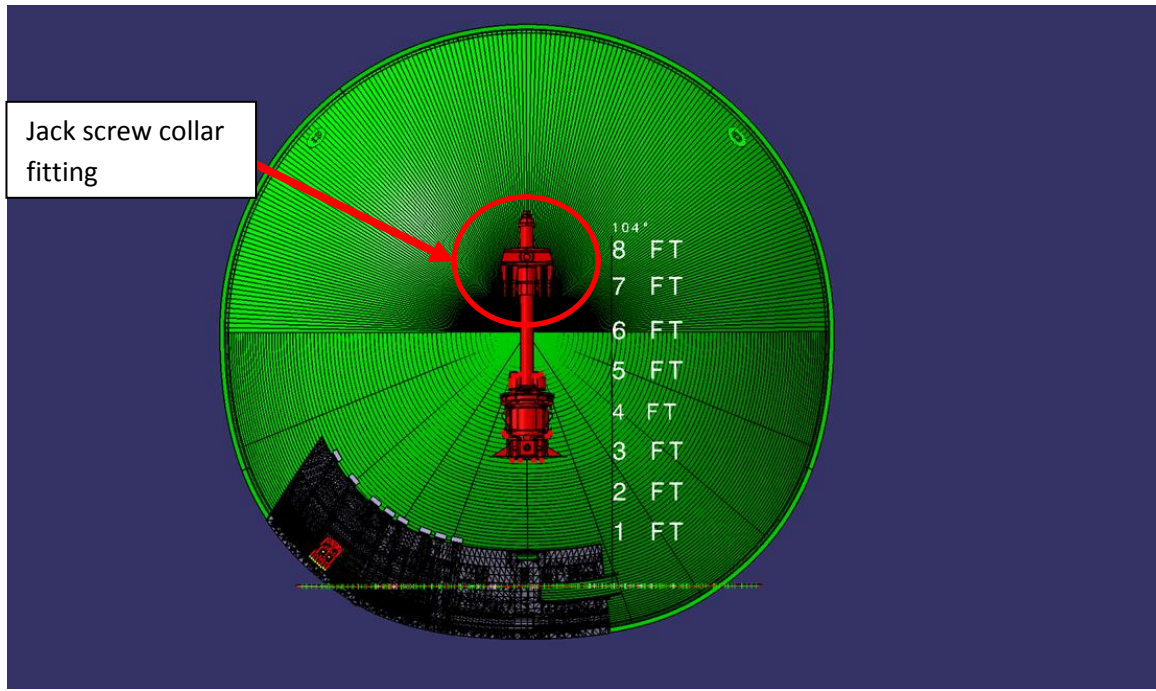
Aft Pressure Bulkhead and Jackscrew viewed looking aft
